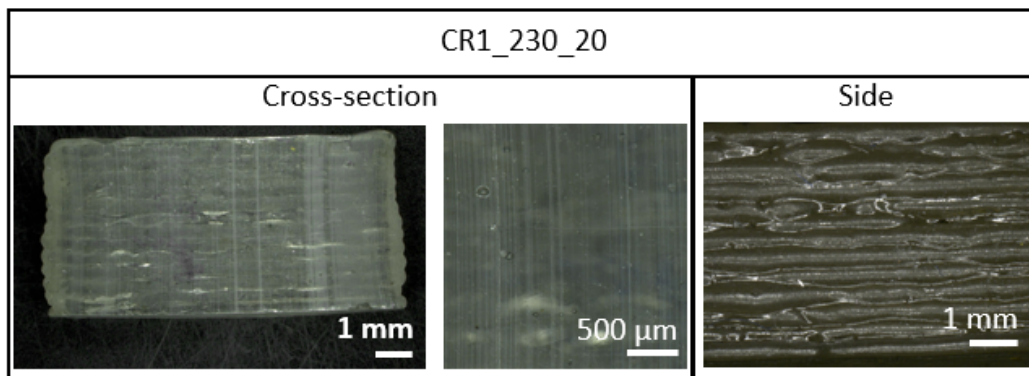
Microscopic pictures of the CR1_230_20 print: the cross-section (left), a close-up of the cross-section (middle) and the side (right)
